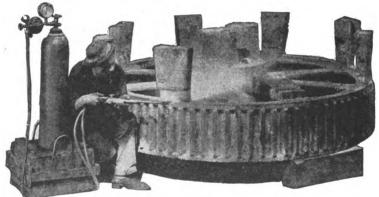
Cutting Risers from Large Gear Courtesy of Oxweld Acetylene Company
